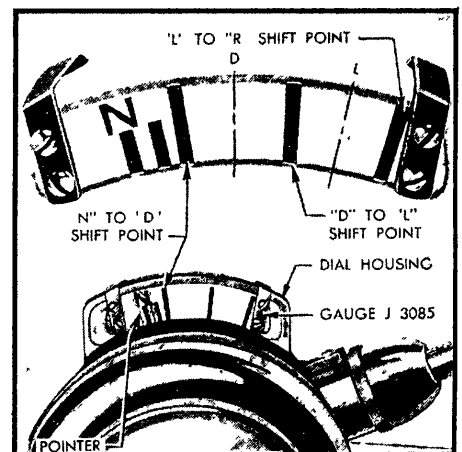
Linkage adjustment gauge J-3085 set for checking shift point
